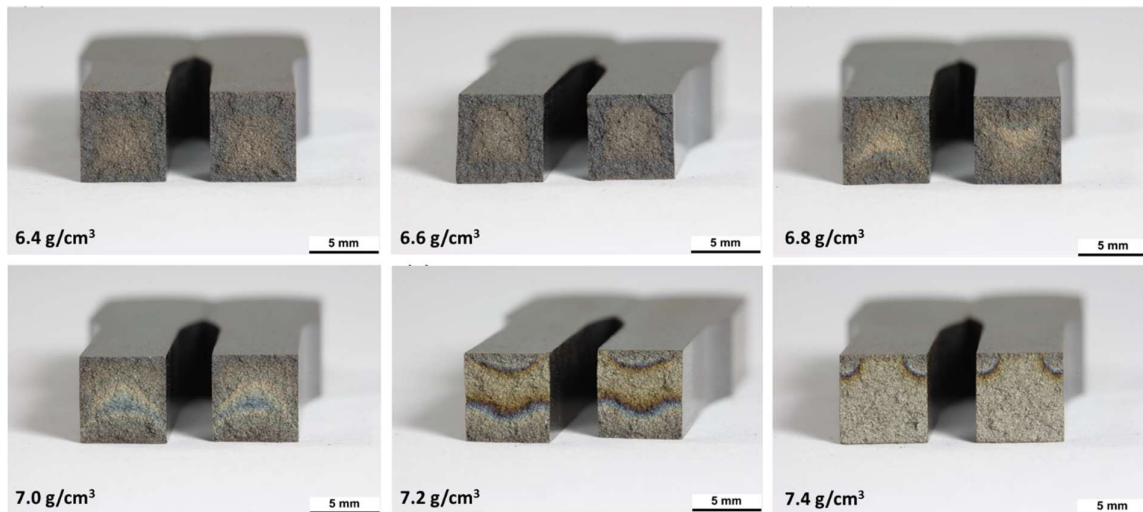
Images of fracture surfaces of cured Ancorlam samples
